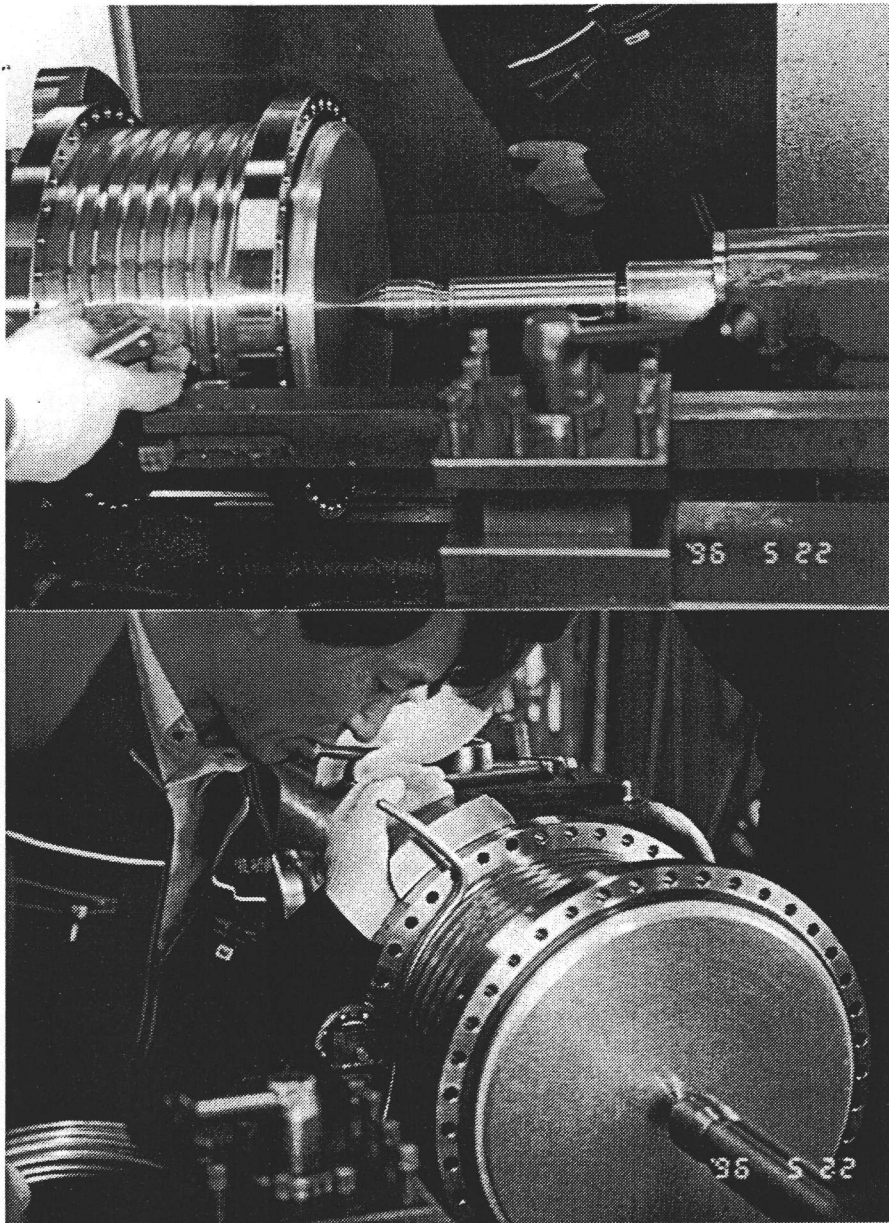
After two flanges are electron beam welded, a round groove is machined spirally on the outer surface of copper and a 3/8"-diam. and 0.8 mm-thick copper pipe is press-inserted in the groove for cooling.
